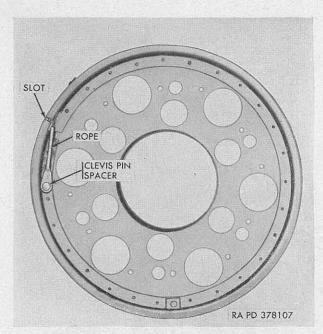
Front view of starter sheave assembly showing method of attaching starter rear rope.
